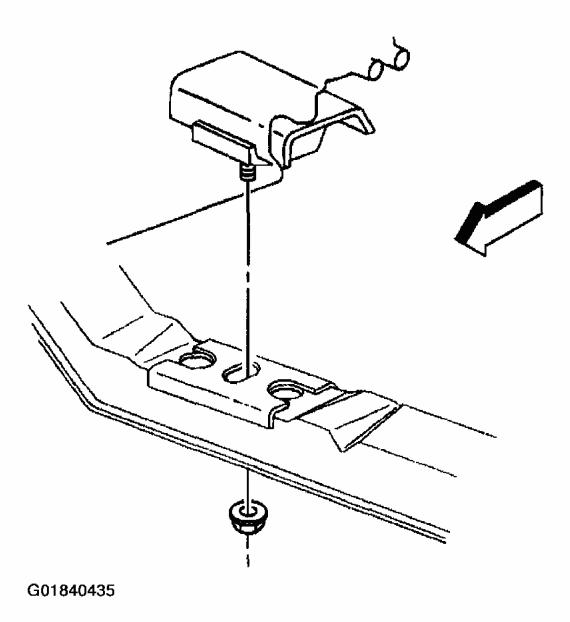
Removing Rear Engine Mount-To-Transmission Support Nut
